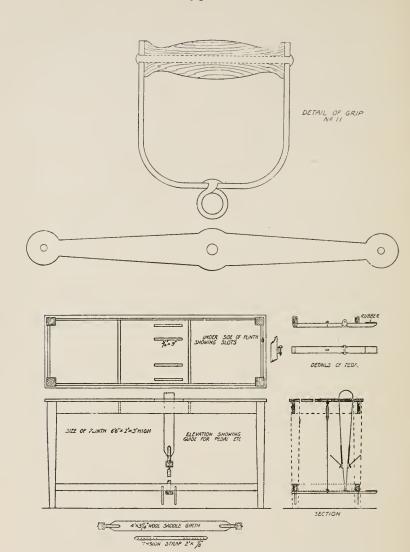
DETAILS OF CONSTRUCTION OF THE TABLE USED FOR STRETCHING AMPUTATION STUMPS.
